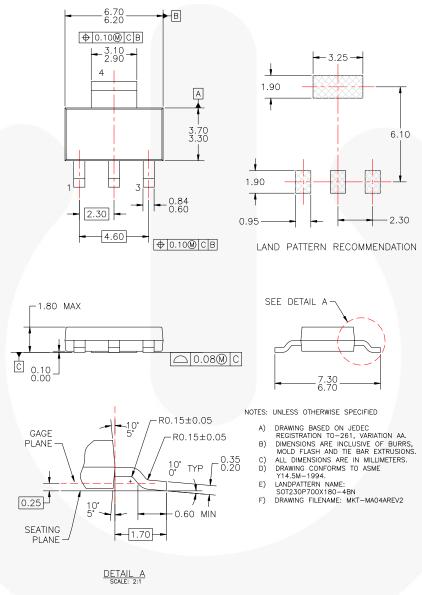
MOLDED PACKAGE, SOT-223, 4-LEAD
